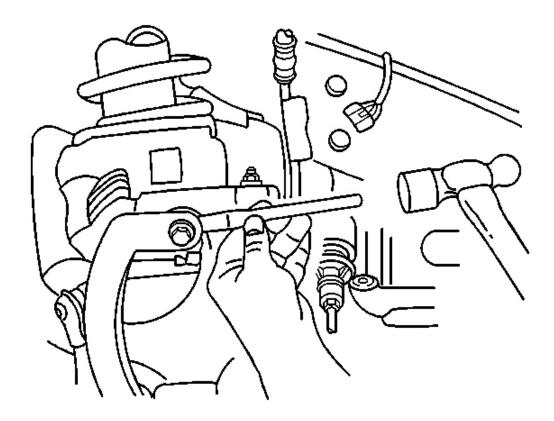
Spreading Shock Module Yoke Courtesy of GENERAL MOTORS CORP.
